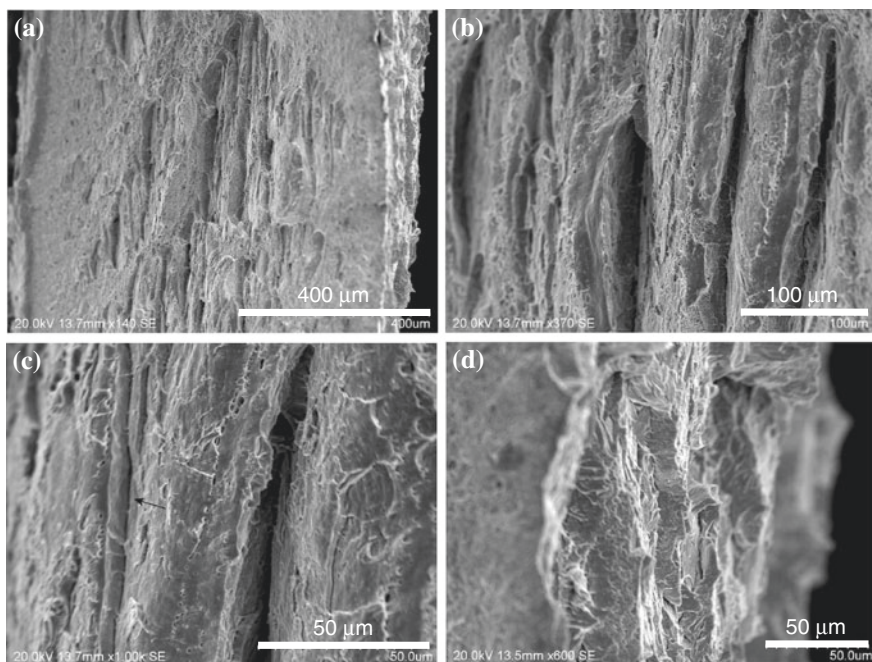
SEM fractographs showing the details of impact fracture surfaces of the steel tempered at 600 °C. a Delaminated fracture surface; b magnified; c magnified from (b) showing decohesion; d edge of the piece. Since the steps are not in the same plane, the area near the left and right edges of the images is faint. With kind permission from Springer Science + Business Media: Metallurgical and Materials Transactions A, Delamination fracture related to tempering in a high-strength low-alloy steel, 41, 2010, 159–171, Wei Yan, Wei Sha, Lin Zhu, Wei Wang, Yi-Yin Shan, Ke Yang, Fig. 12
